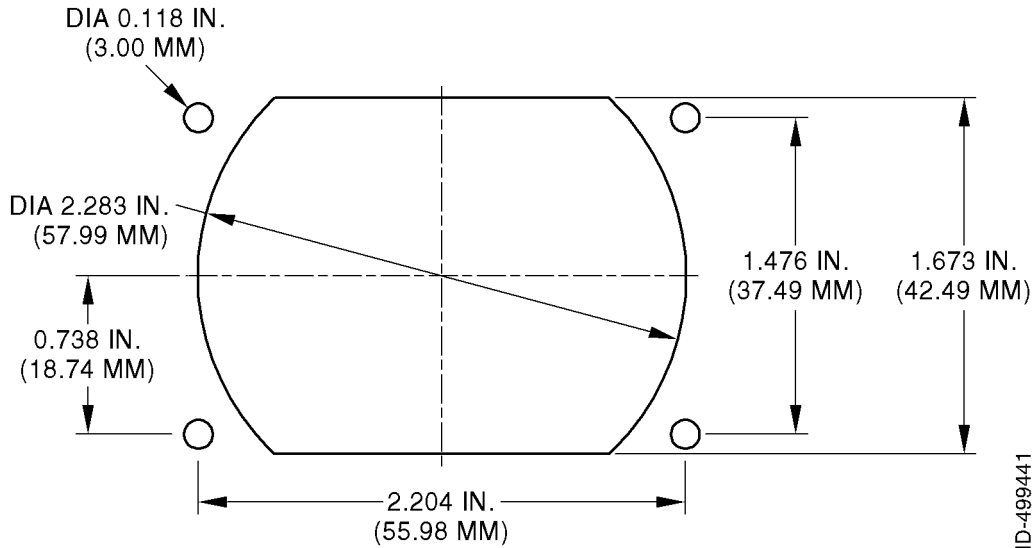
(Sheet 1 of 1) KGX Control Panel Ultra-Compact Mounting Hole Cut-Out Option
